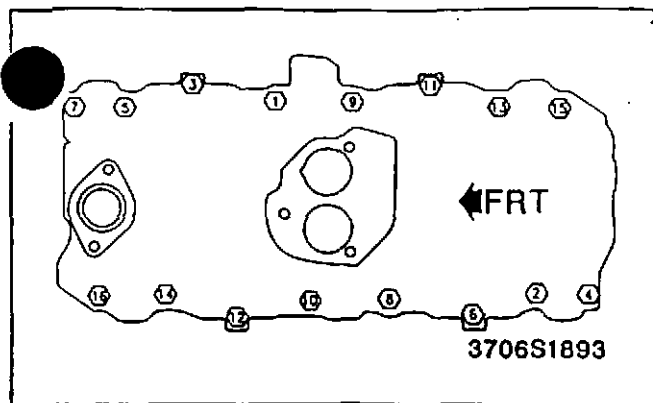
Intake Manifold Tightening Sequence (7.4L Engines)
